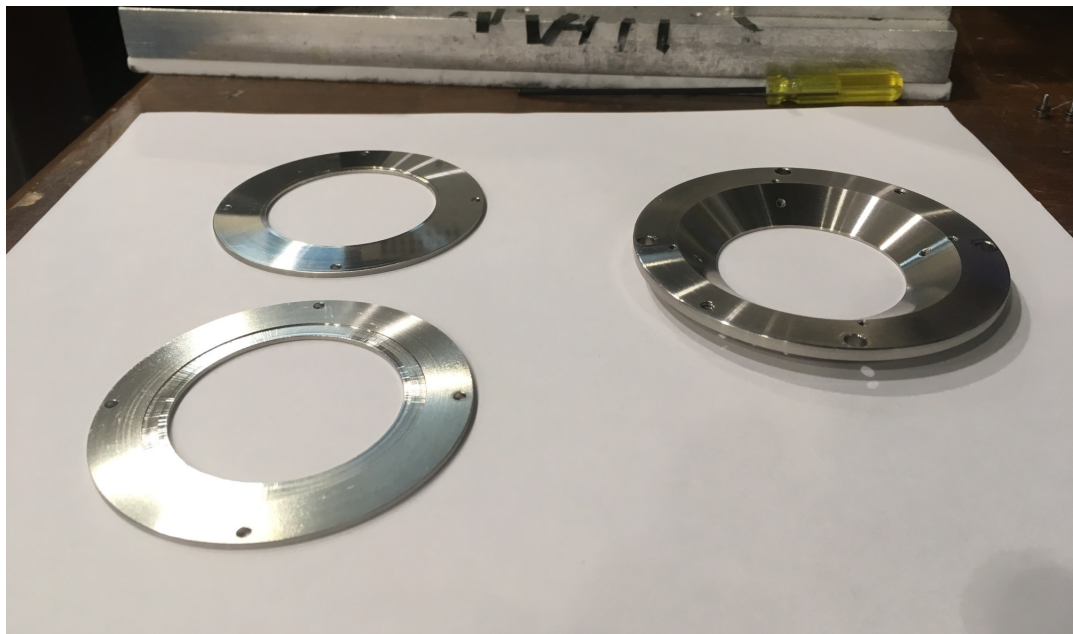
The target holder and its component parts. Left: the target backing brackets. Different groove diameters accommodate either the thick target (wider), or the silicon-backed ^{10}Bor ^{239}Pu deposits (narrower). Right: The stainless steel target mount. Targets are mounted facing away from the page.
